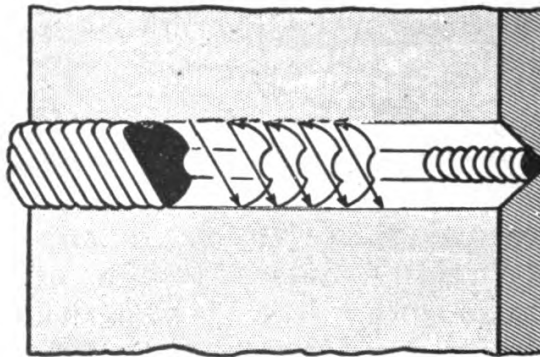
Job 9 (Horizontal butt weld).
